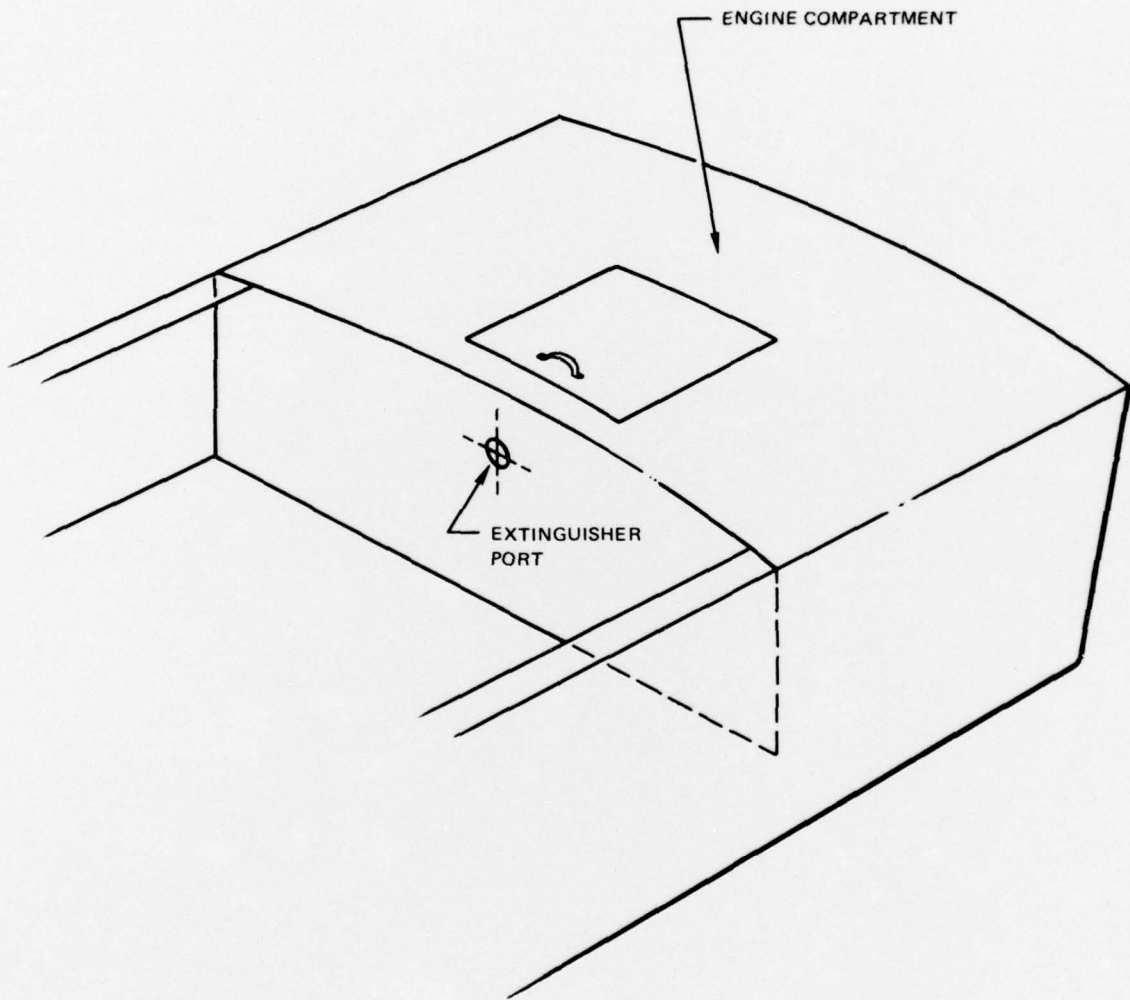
TYPICAL EXTINGUISHER PORT ARRANGEMENT
